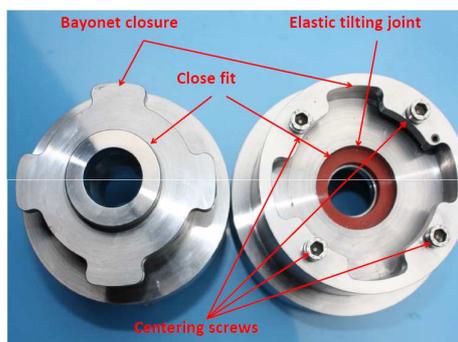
Disassembled tilting die having a bayonet closure showing the special
